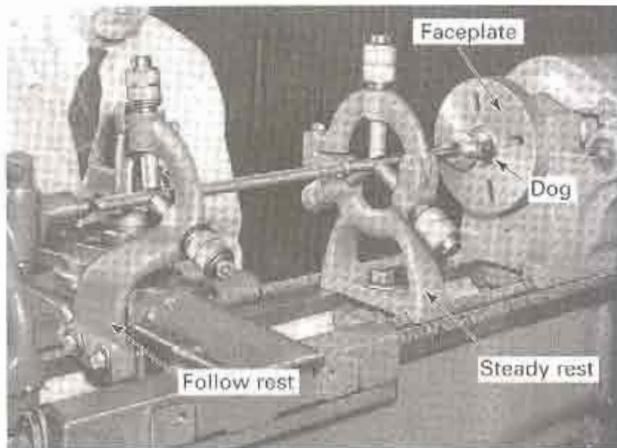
Cutting a thread on a long, slender workpiece, using a follow rest (left) and a steady rest (right) on an engine lathe. Note the use of a dog and face plate to drive the workpiece. (Courtesy of South Bend Lathe.)
